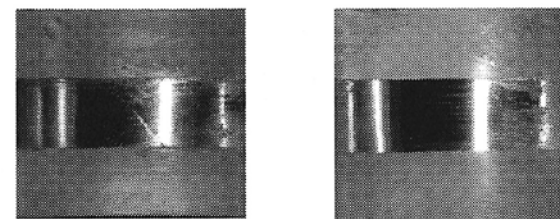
Effect of cutting speed on machined surface ($f=0.1\text{mm/rev}$)
